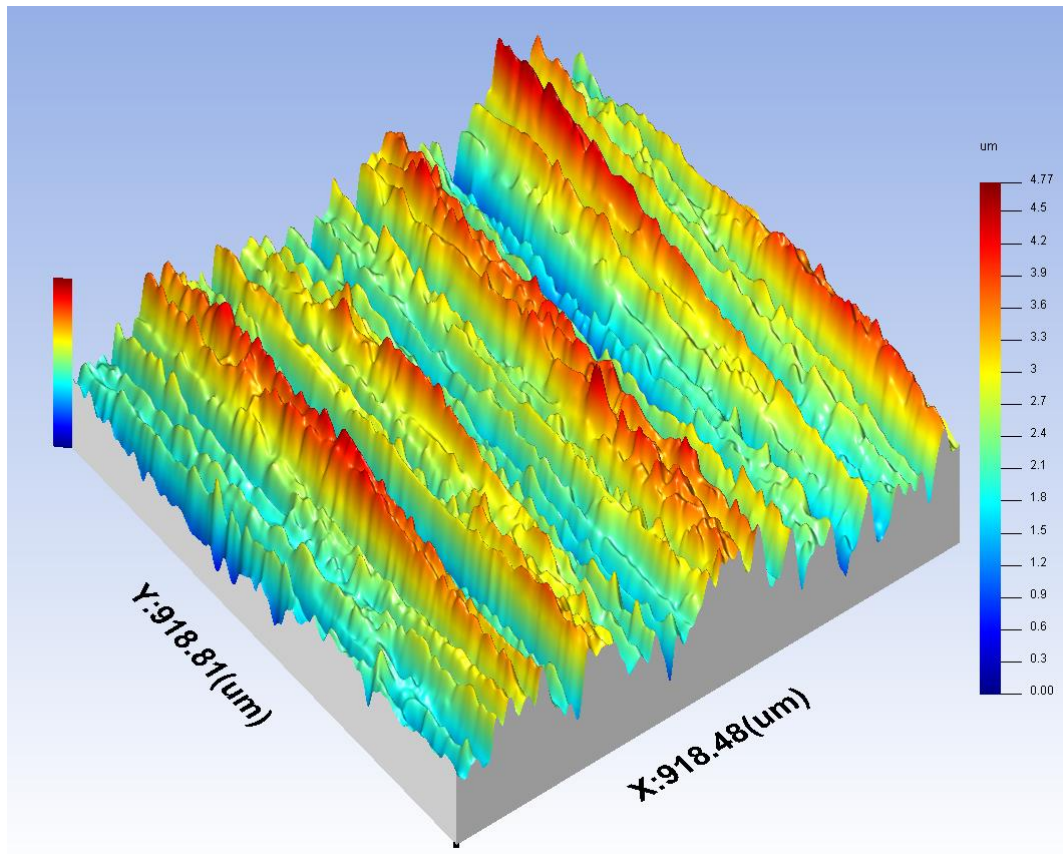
P20 tool steel ground finish showing rough surface finish left from manual grinding machine.
